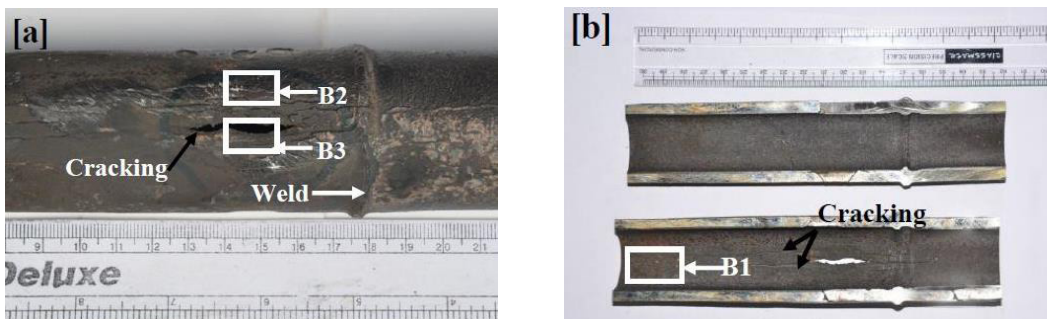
Macro image and sampling location from damaged tube B: a) cracking over surface, and b) appearance of inner surface
